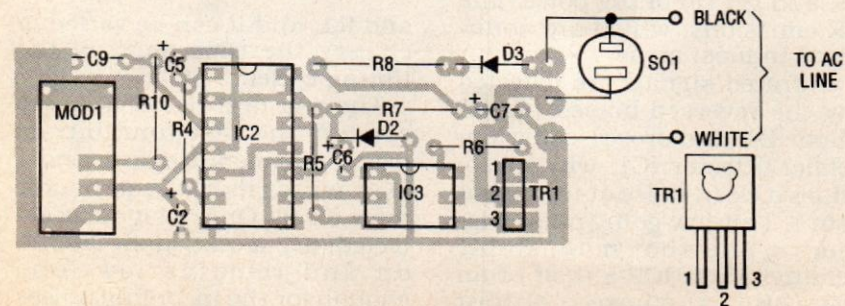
PARTS-PLACEMENT DIAGRAM for the IR switch that contains MOD1. Use only the parts shown on this board, and disregard the parts that are used only on the other board.
